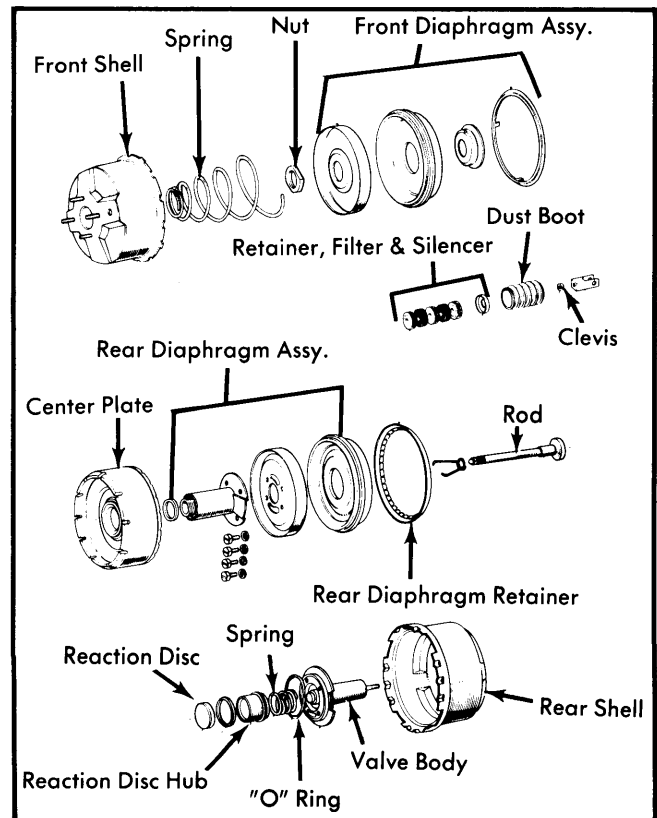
Exploded View of Land Cruiser Tandem Brake Booster Unit
